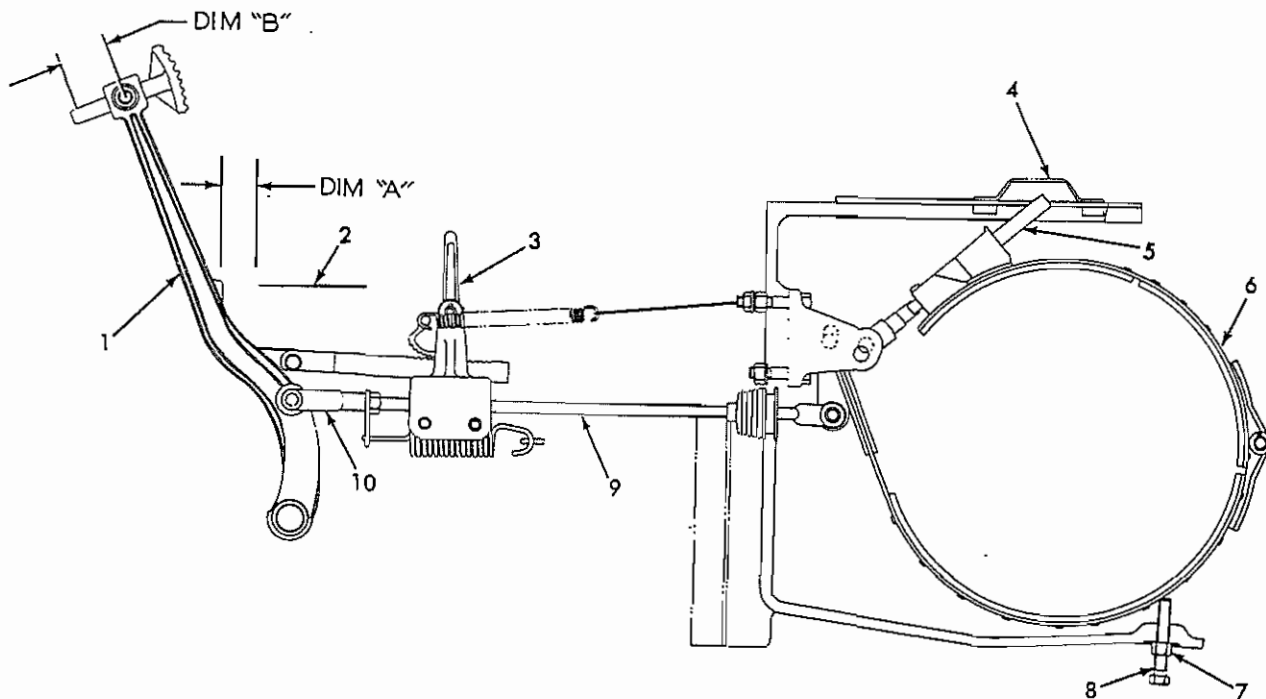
HD6 Brake Control Linkage, HD6G Similar
